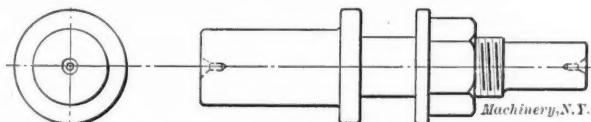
Arbor for Cutting Concave Knurls in the Milling Machine
